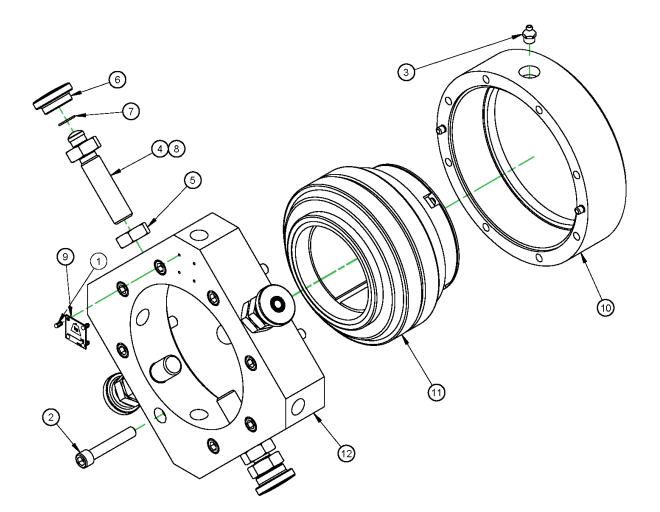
4-JAW CHUCK FACE ADJUSTING 3.5 ID BEARING ASSEMBLY (P/N 92850)
